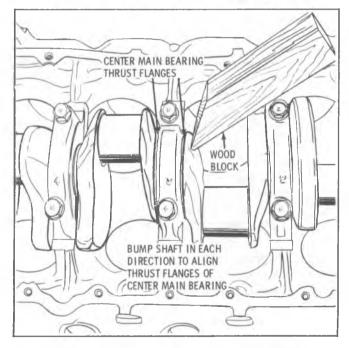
Aligning Center Rear Main Bearing Flanges
